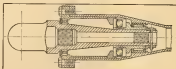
Diagram of blade attachment employing thrust ballbearing bearing.
